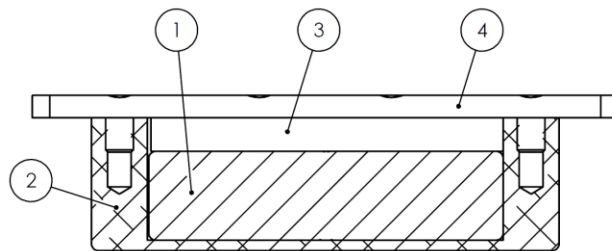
Section view of magnetic module containing 4x2x1" magnet (design variant 1)
